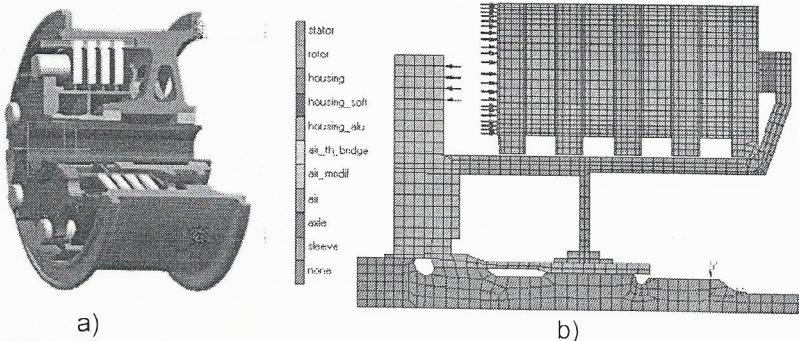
a) Solid model of a wheel brake assembly b) Mechanical load during brake action
